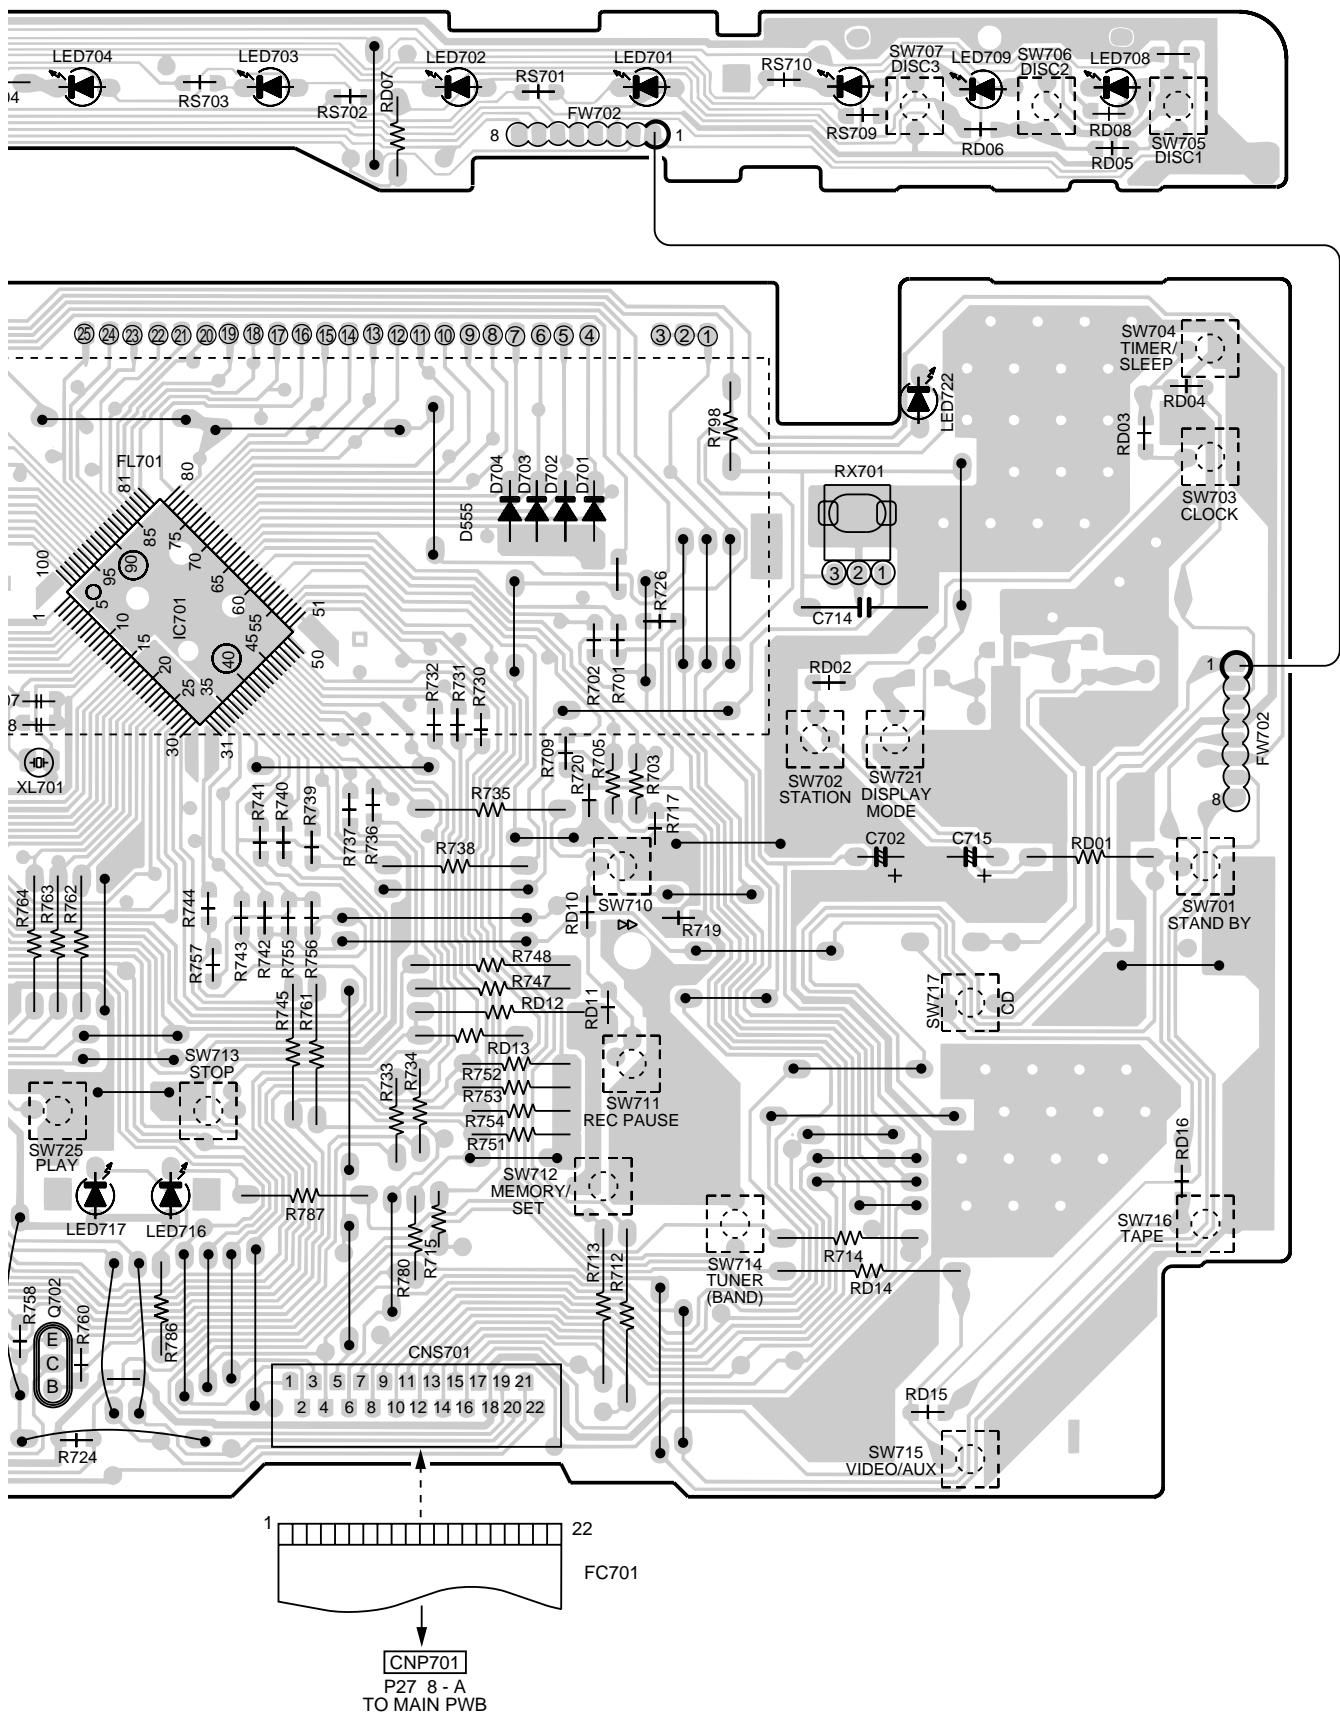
WIRING SIDE OF P.W.BOARD (2/7)
